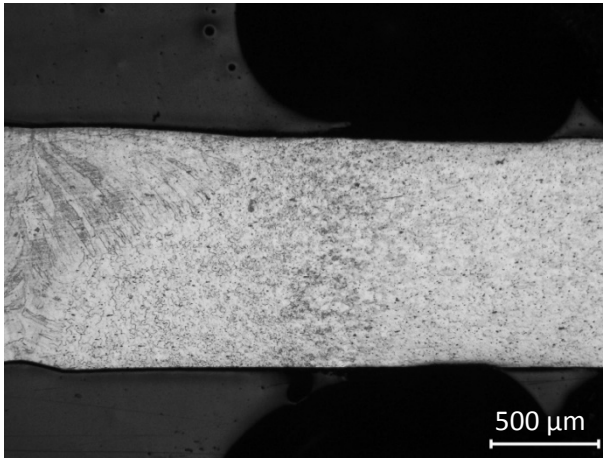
Macrograph of A-A 1.0 mm thick similar joint showing the welded zones
